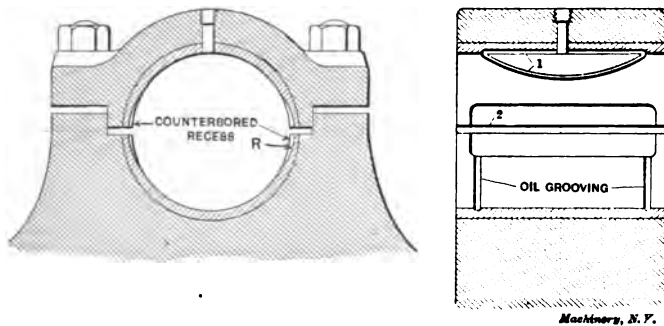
Section of Outboard Bearing, showing Oil Grooving and Counterbored Recess.
